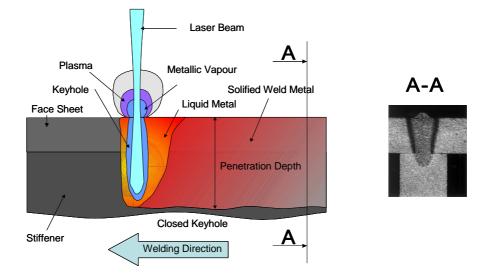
laser welding of all-metal sandwich structures (from Roland et al. 1998).
